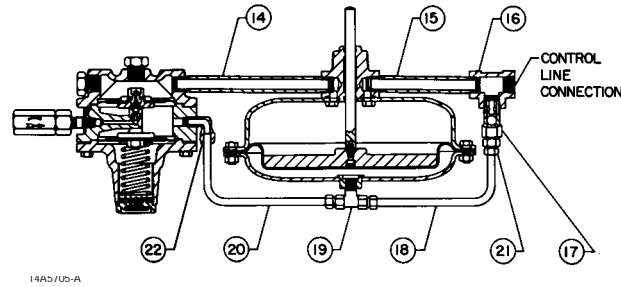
Type 61LD Pilot and Type 1806 Relief Valve Mounting
